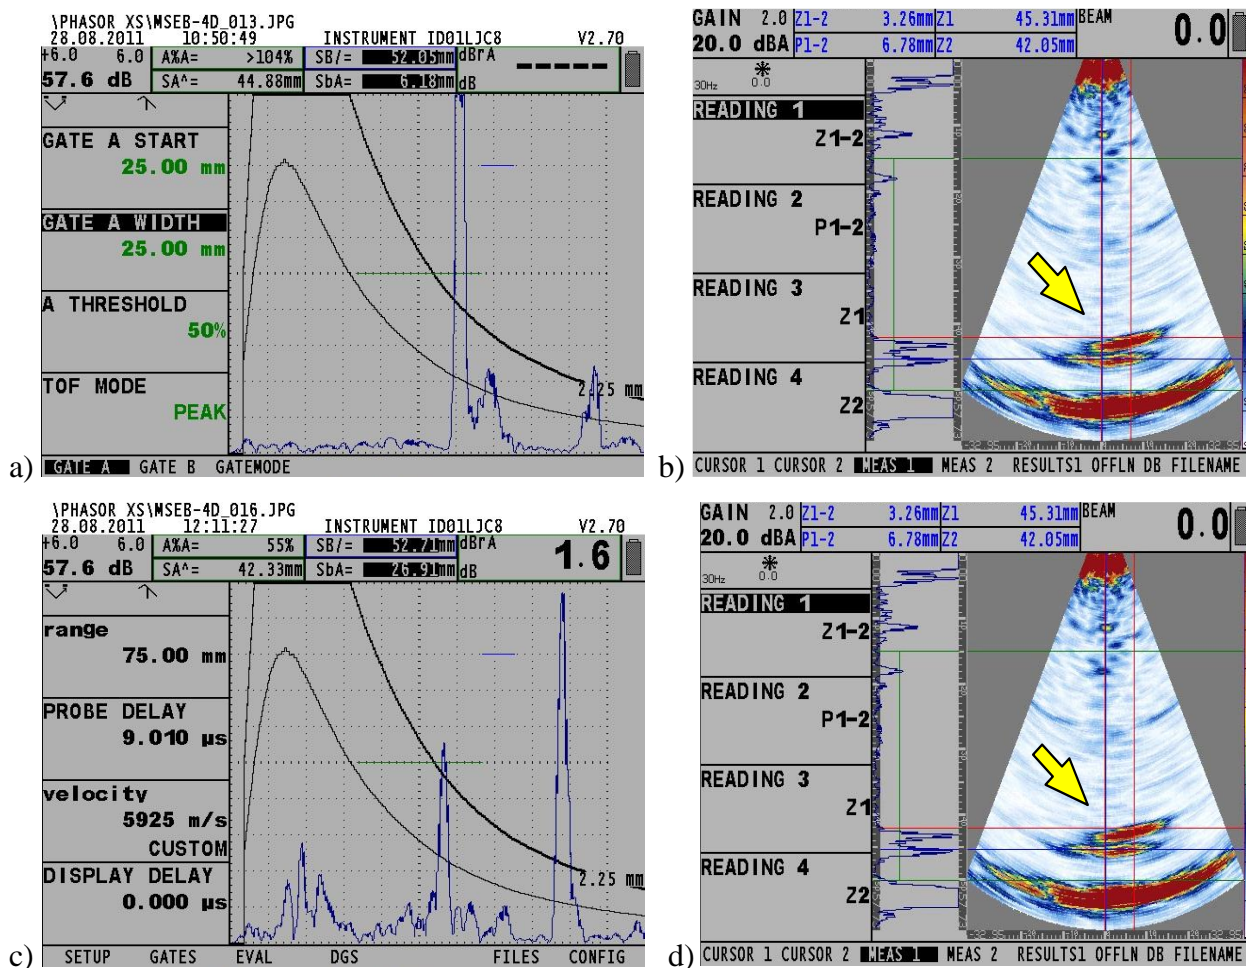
Echographs of indications of lamellar tearing of parent metal in the area of welded joints of the upper ring of guide vane apparatus (detected by ultrasonic testing)
